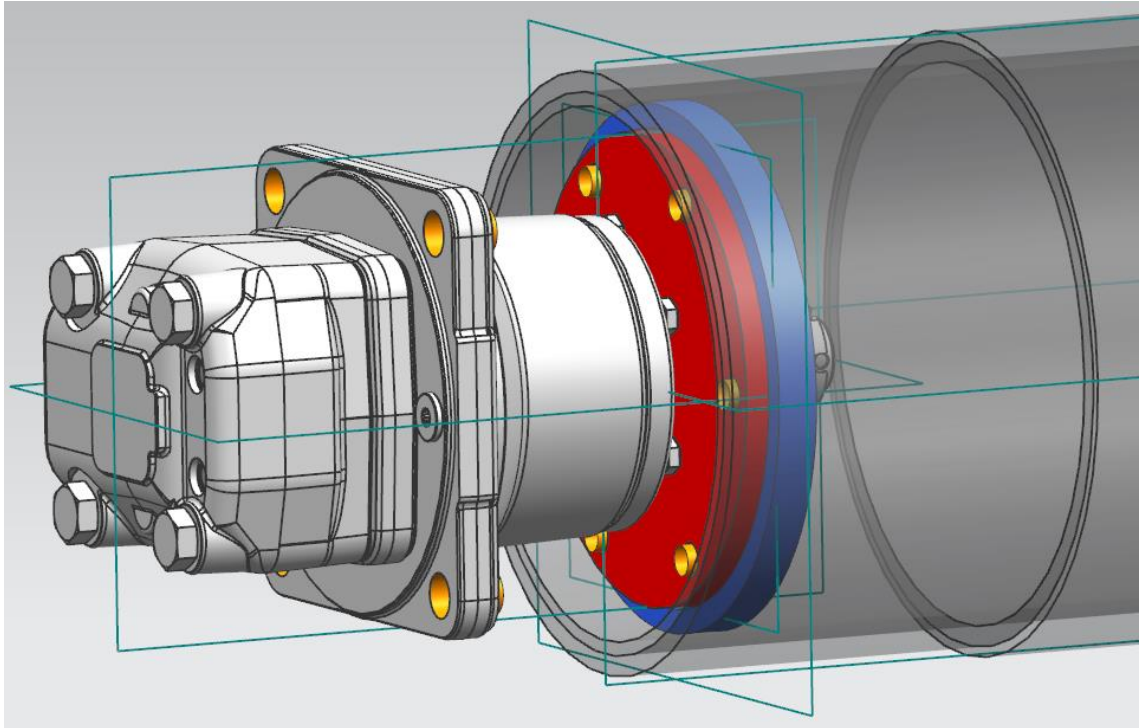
Flange attachment between a drive drum and a hydraulic motor
